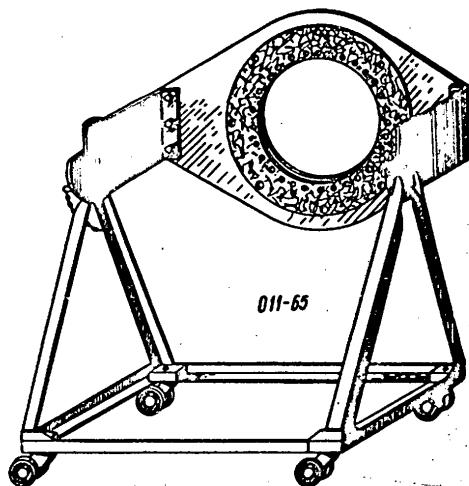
SMALL STAND FOR ASSEMBLING CRANKCASE WITH CRANKSHAFT
